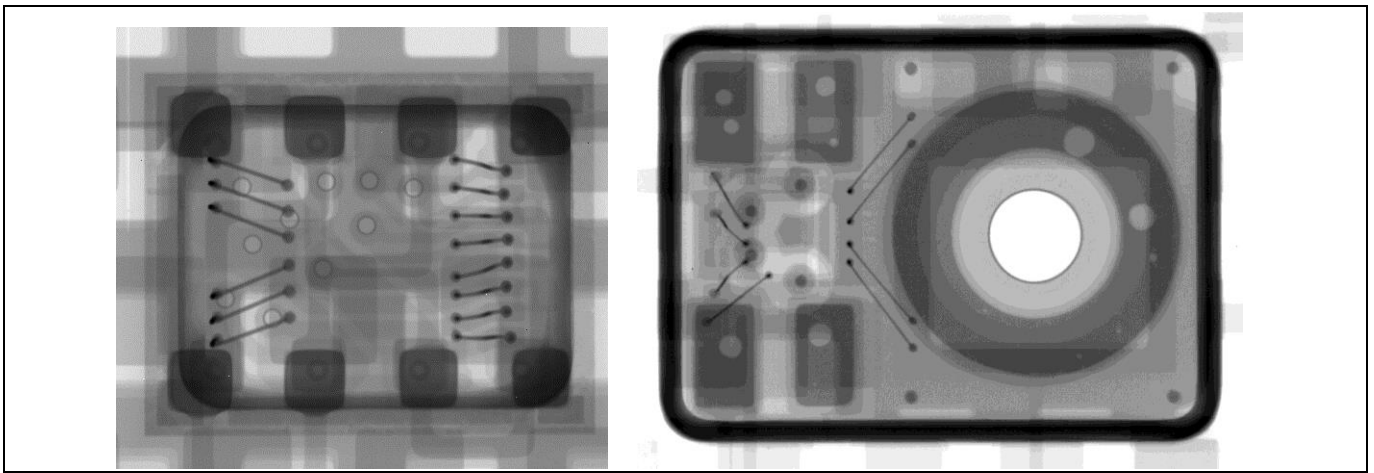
Examples of properly soldered MEMS packages inspected by X-Ray.
